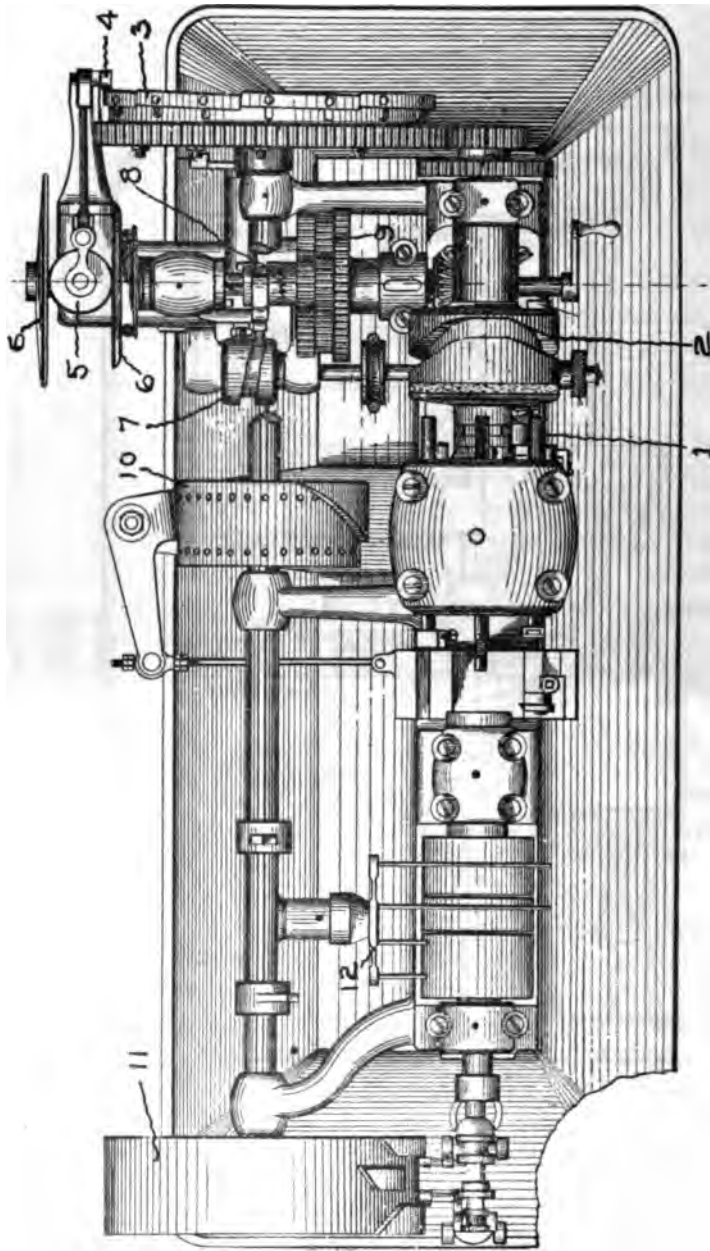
SHOWING CONTROL BY PERMANENT CAMS AND ADJUSTABLE CAMS AND DOGS. CLEVELAND AUTOMATIC MACHINE CO.
